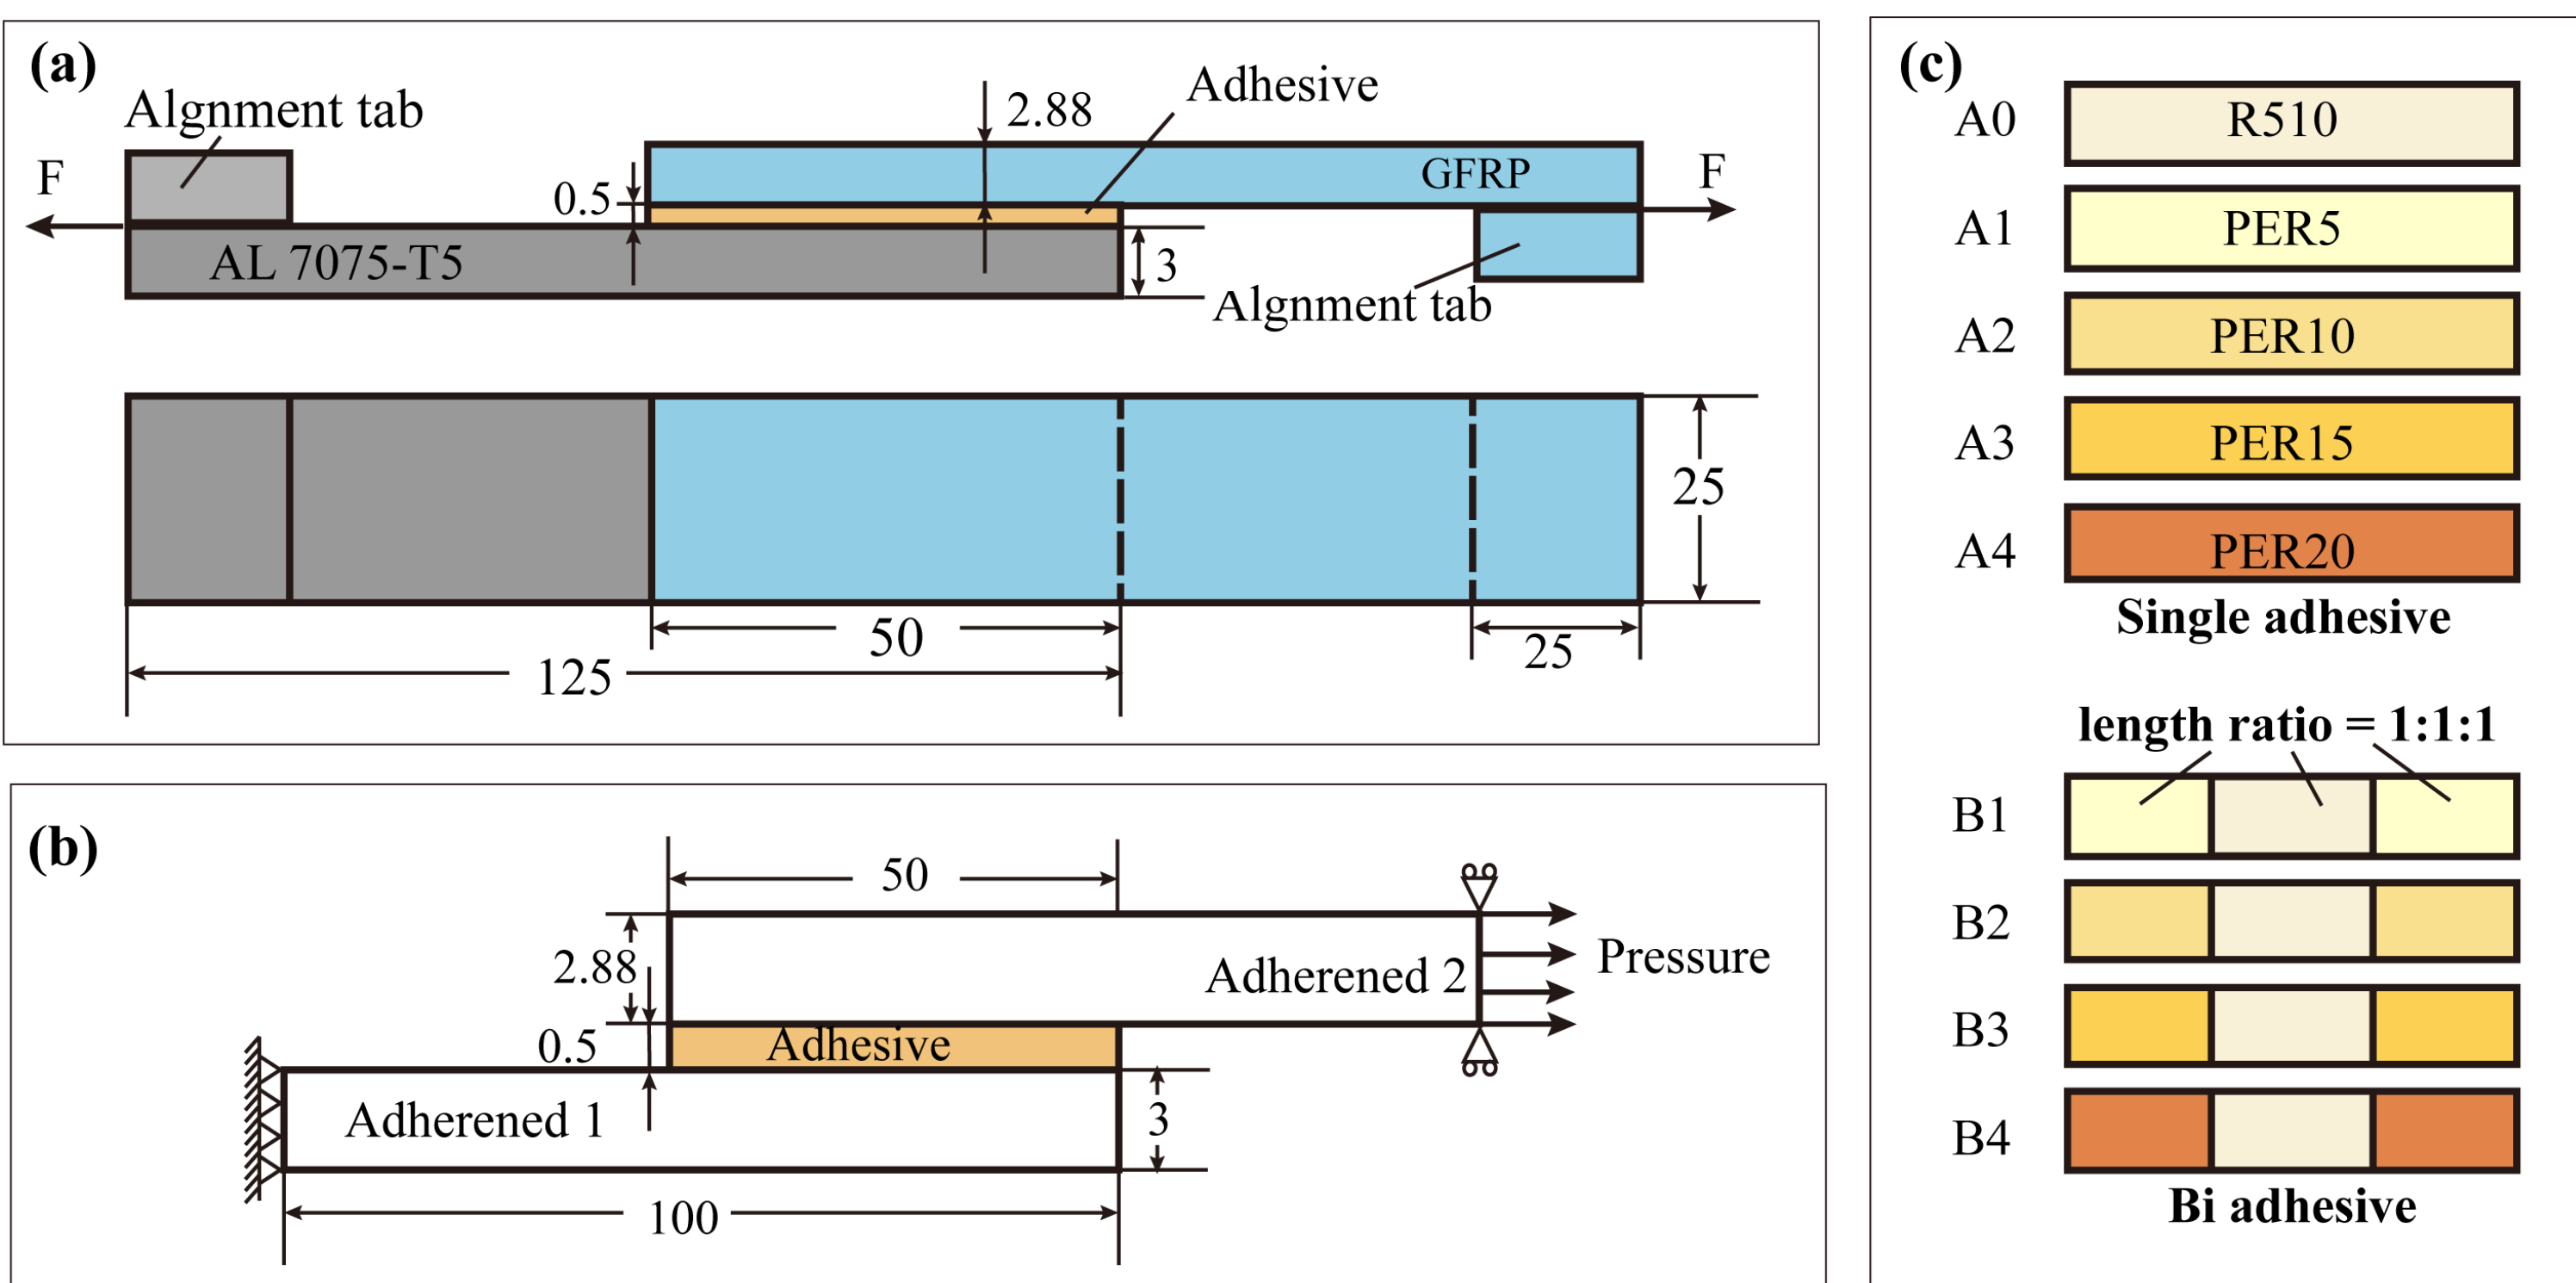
Single-lap joint geometry, FE model, and adhesive layout definitions.
